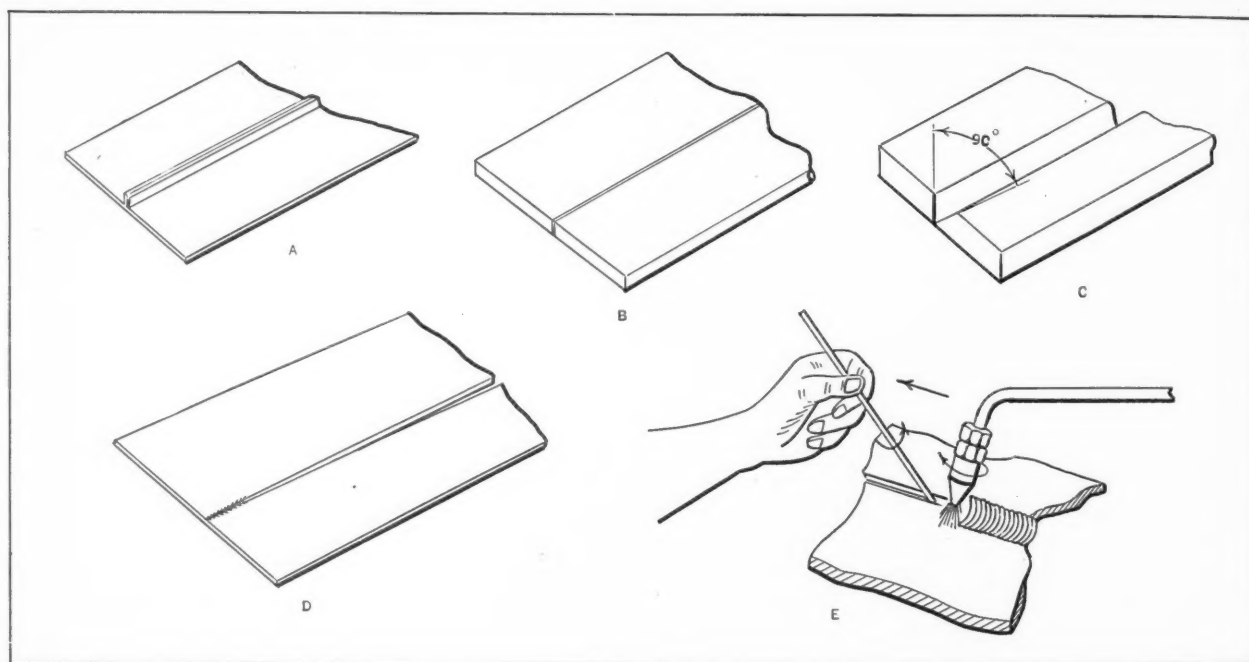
Methods Used in Welding Brass of Different Thicknesses
